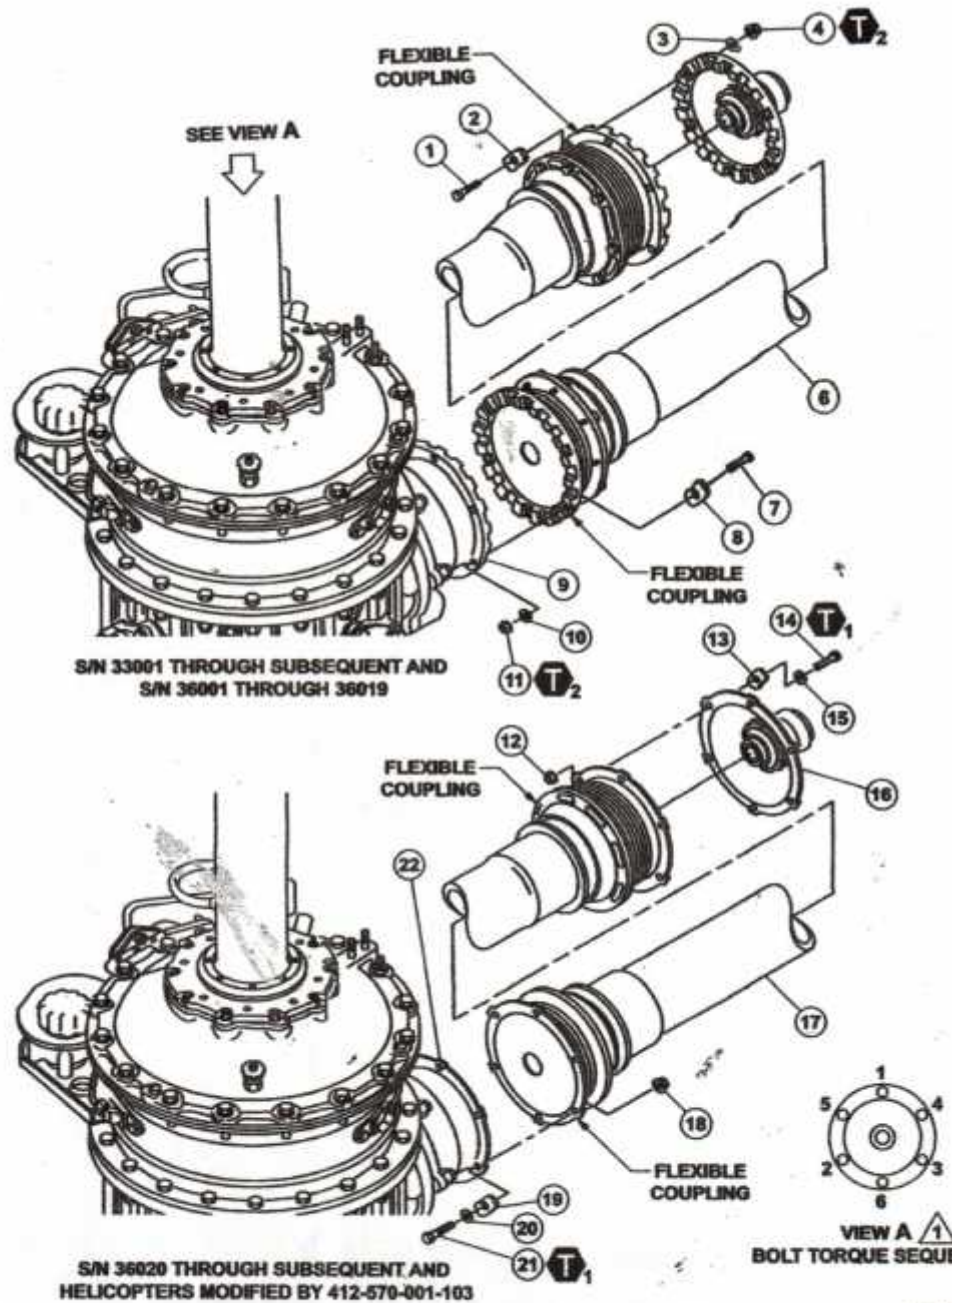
Engine-to-Transmission (Main) Driveshaft (Sheet 1 of 2)
